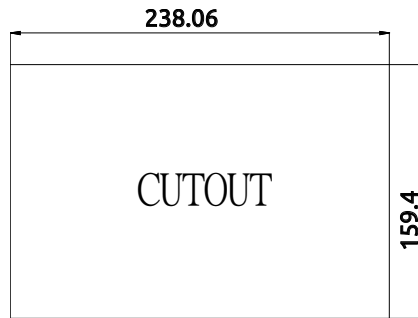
PKX-SP2-KL-10 Cutout Dimensions
